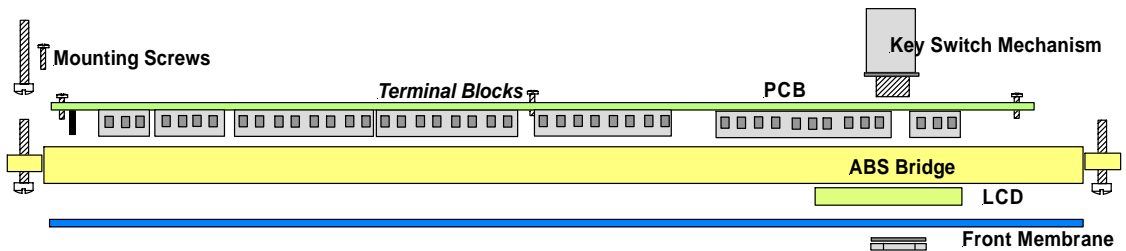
Exploded Top View of Membrane, Bridge and PCB
